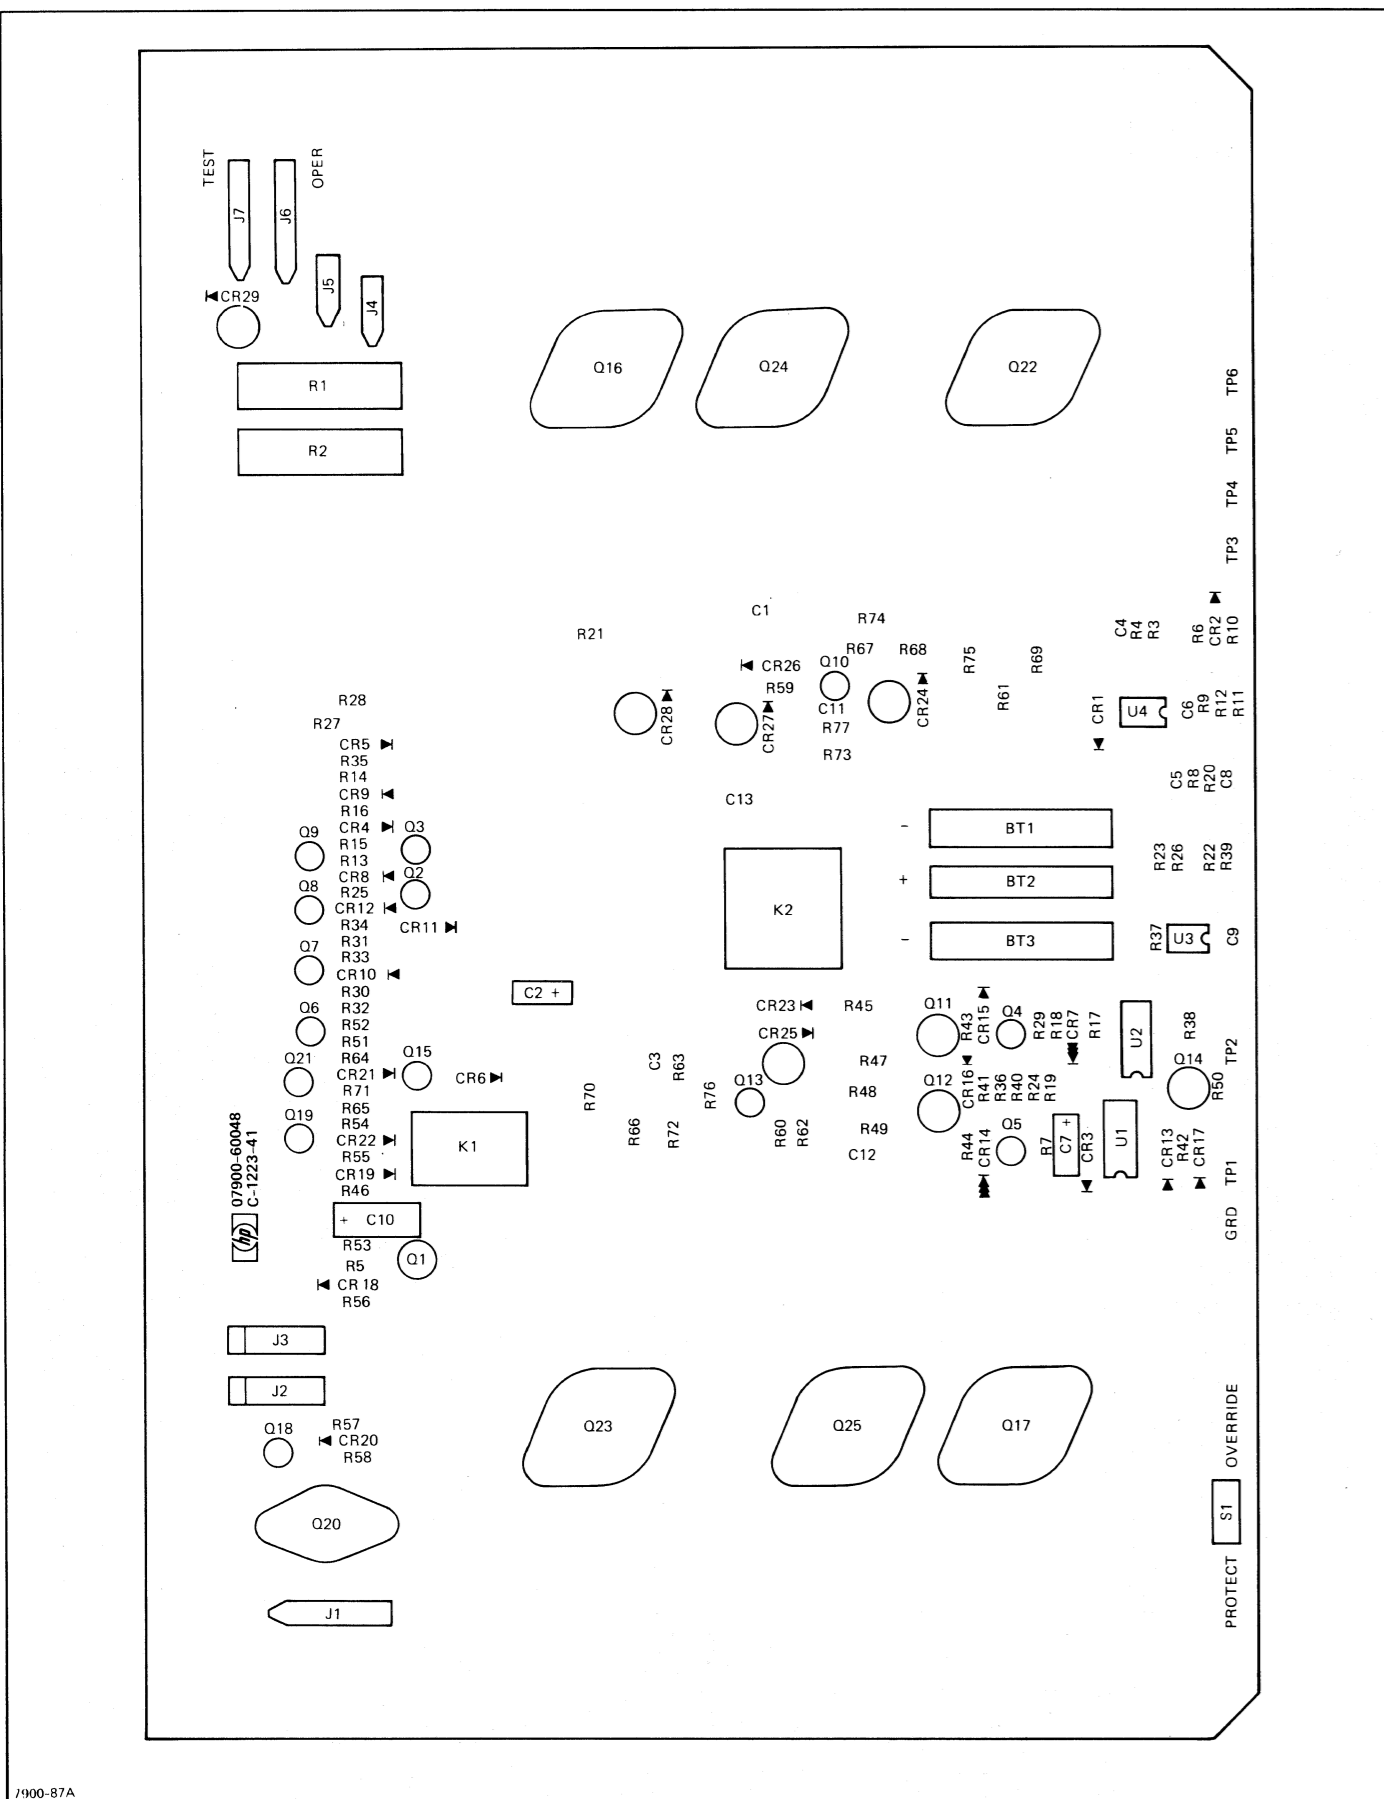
Servo Amplifier Assembly A2 Parts Location Diagram
